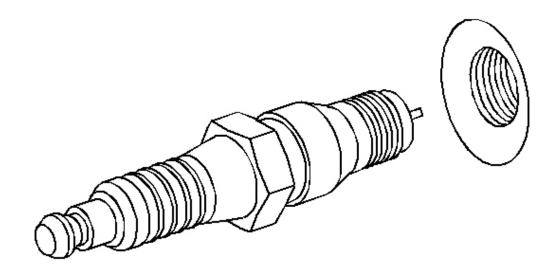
View Of Spark Plug And Sparkplug Seat Courtesy of GENERAL MOTORS CORP.
